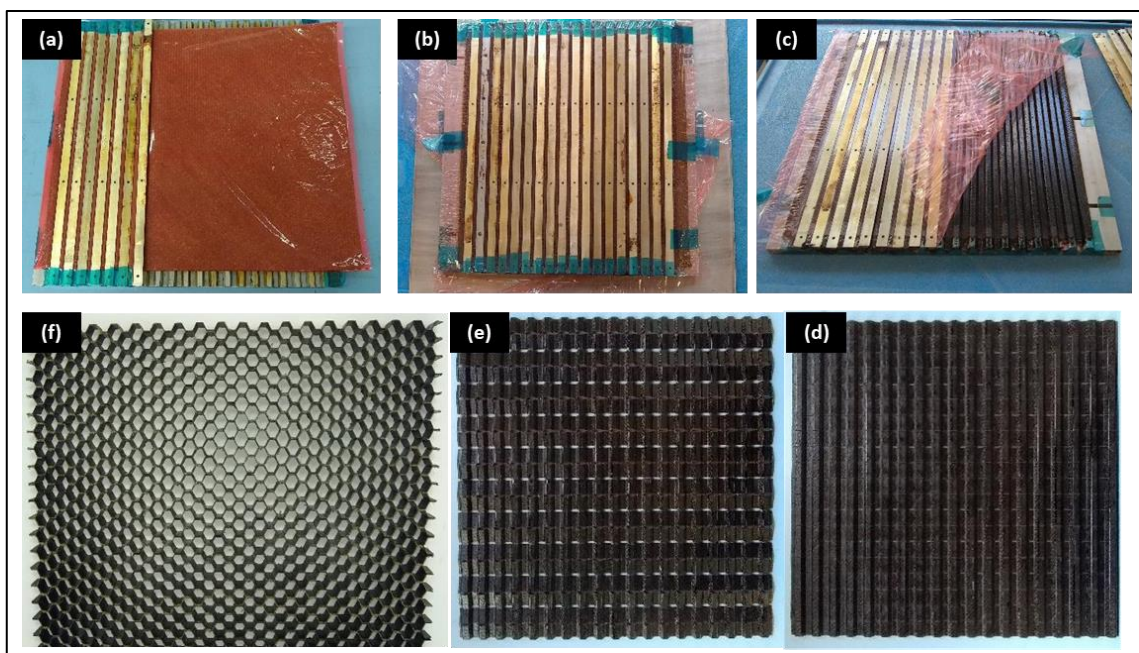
Kirigami Flax/PFA manufacturing: (a) prepreg mold fitting, (b) prepreg ready for the hot press cycle, (c) cured corrugated sheet, (d) laser cut corrugated sheet, (e) corrugated sheet folding prior to adhesive application, (f) final honeycomb.
